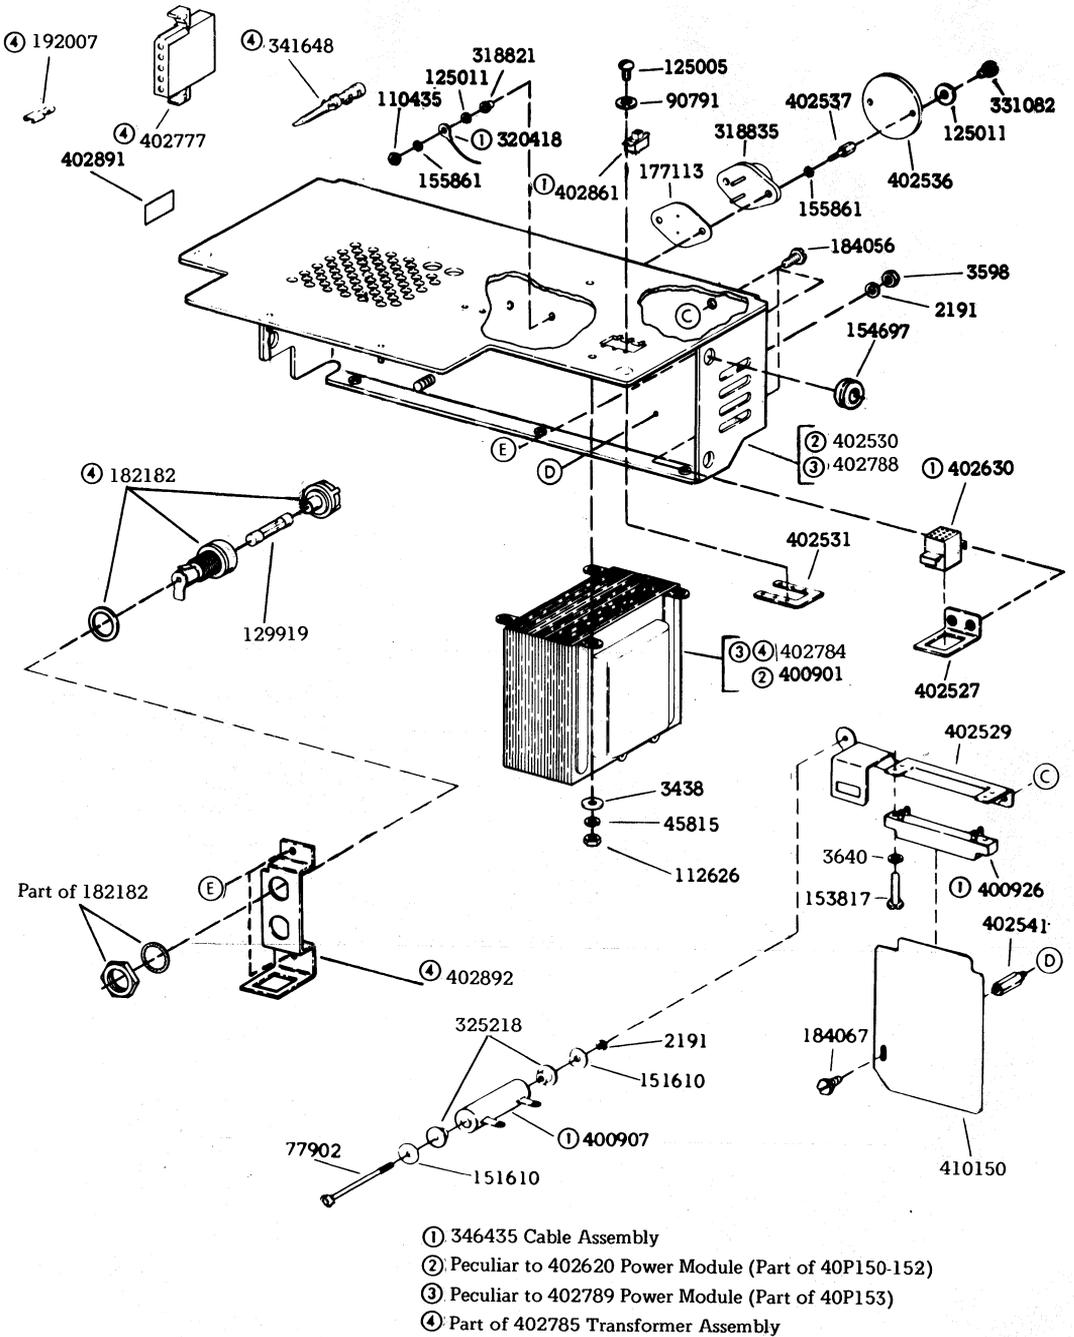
402620 and 402789 Power Module Assemblies (Late Design) (Tractor Feed - 80-Column)
